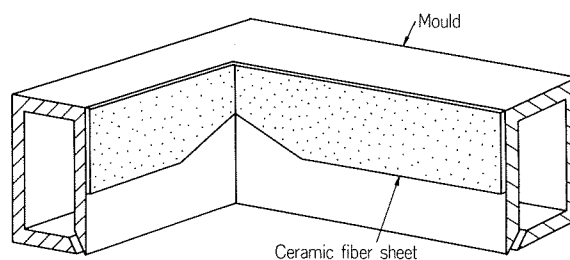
Schematic illustration of "fiber sheet hot top casting process"⁴⁾.
